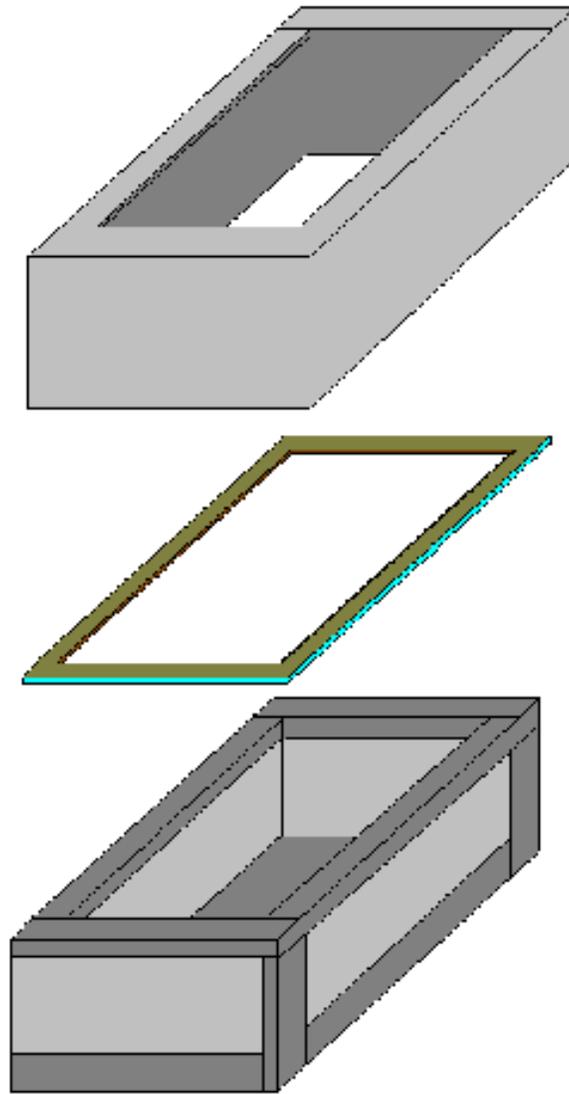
The inner box lid, the glass, and the inner box bottom pieces fit together to create the inner box.
